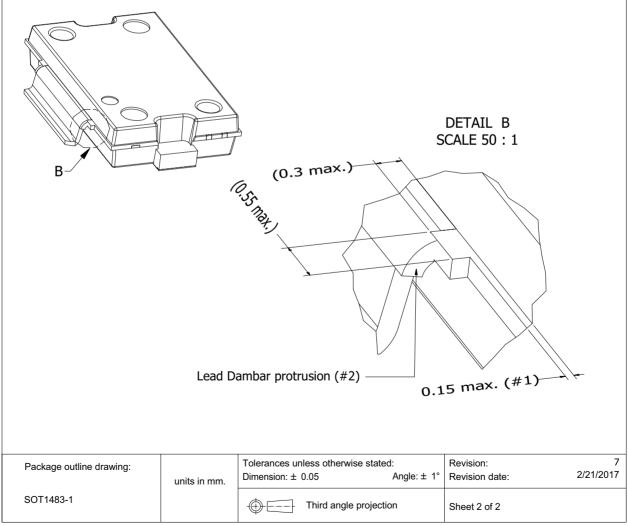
Package outline SOT1483-1 (sheet 2 of 2)
